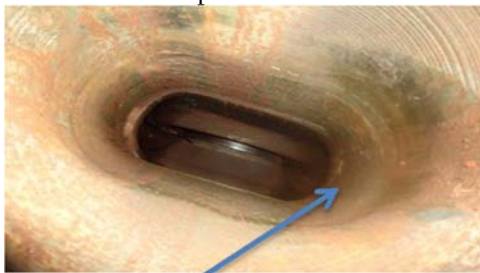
Electrode piece found in suction nozzle of centrifugal compressor during boroscopic inspection
